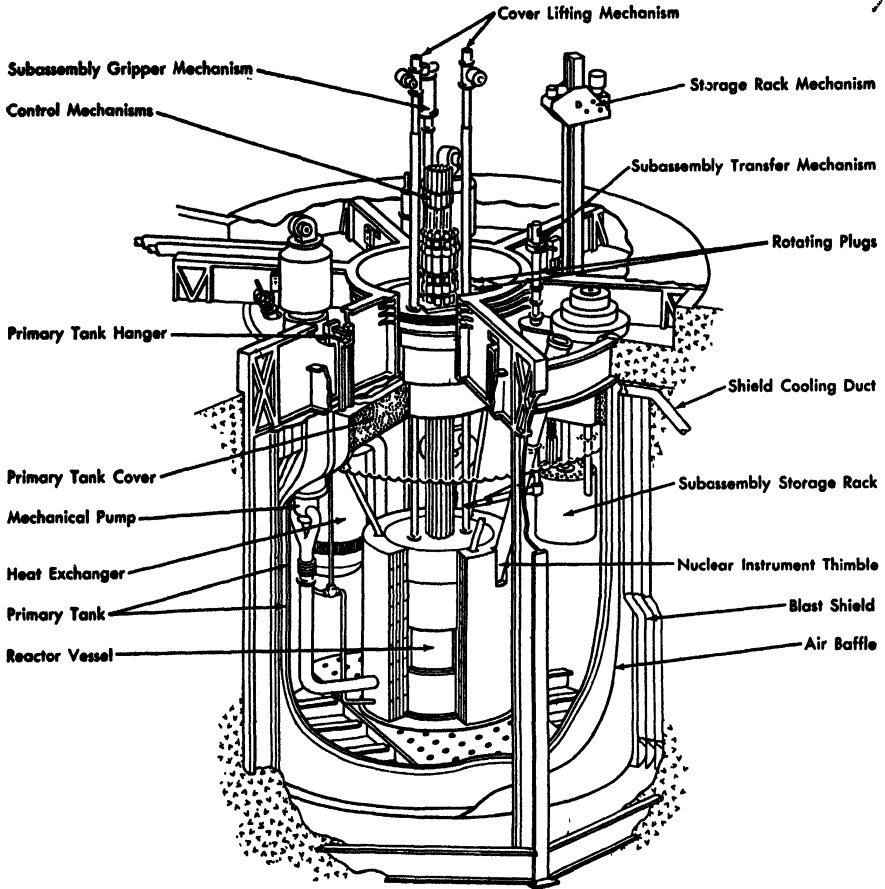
Cutaway drawing of the EBR-II primary system.
